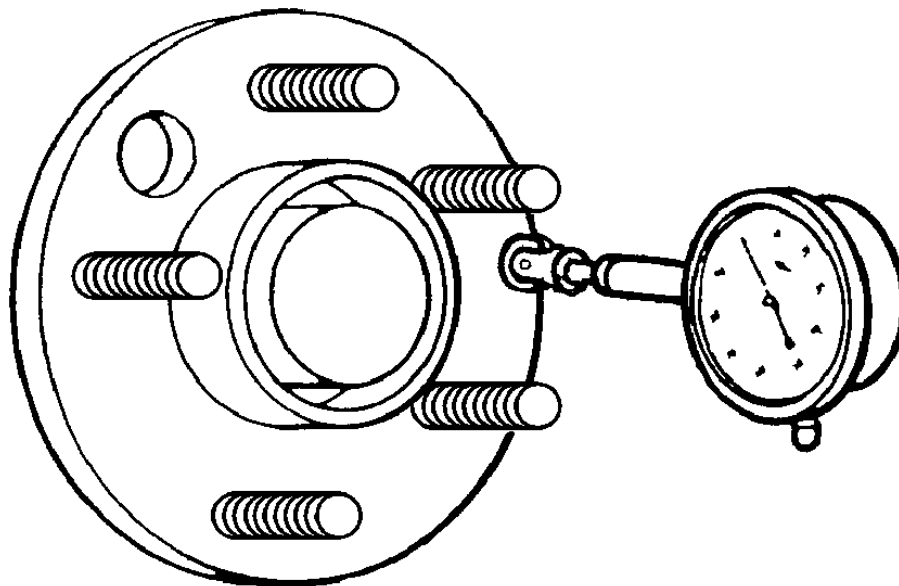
Measuring Wheel Hub/Axle Flange Runout
